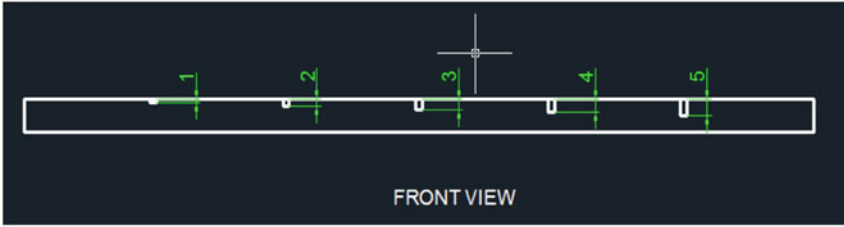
EDM wire cut machine process for mild steel ECT testing sample preparation
